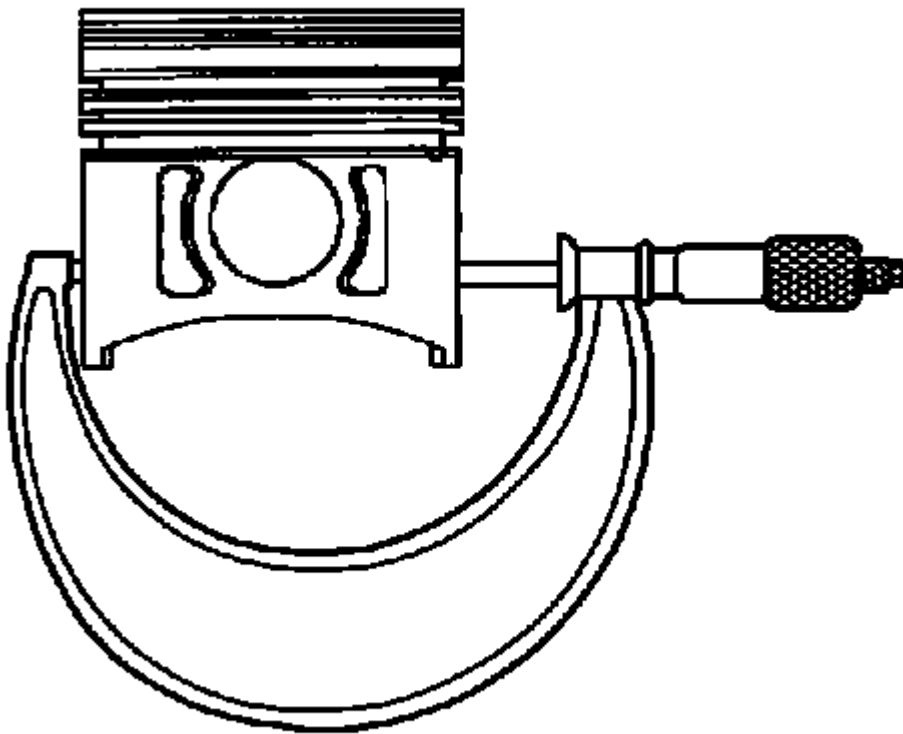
Measuring Piston Outside Diameter Using Micrometer
